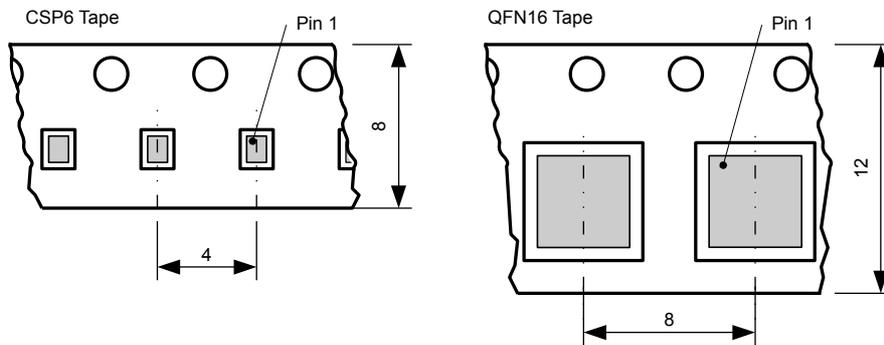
CSP10 and QFN16 Tape Dimension. Parts are placed with solder pads on bottom side
